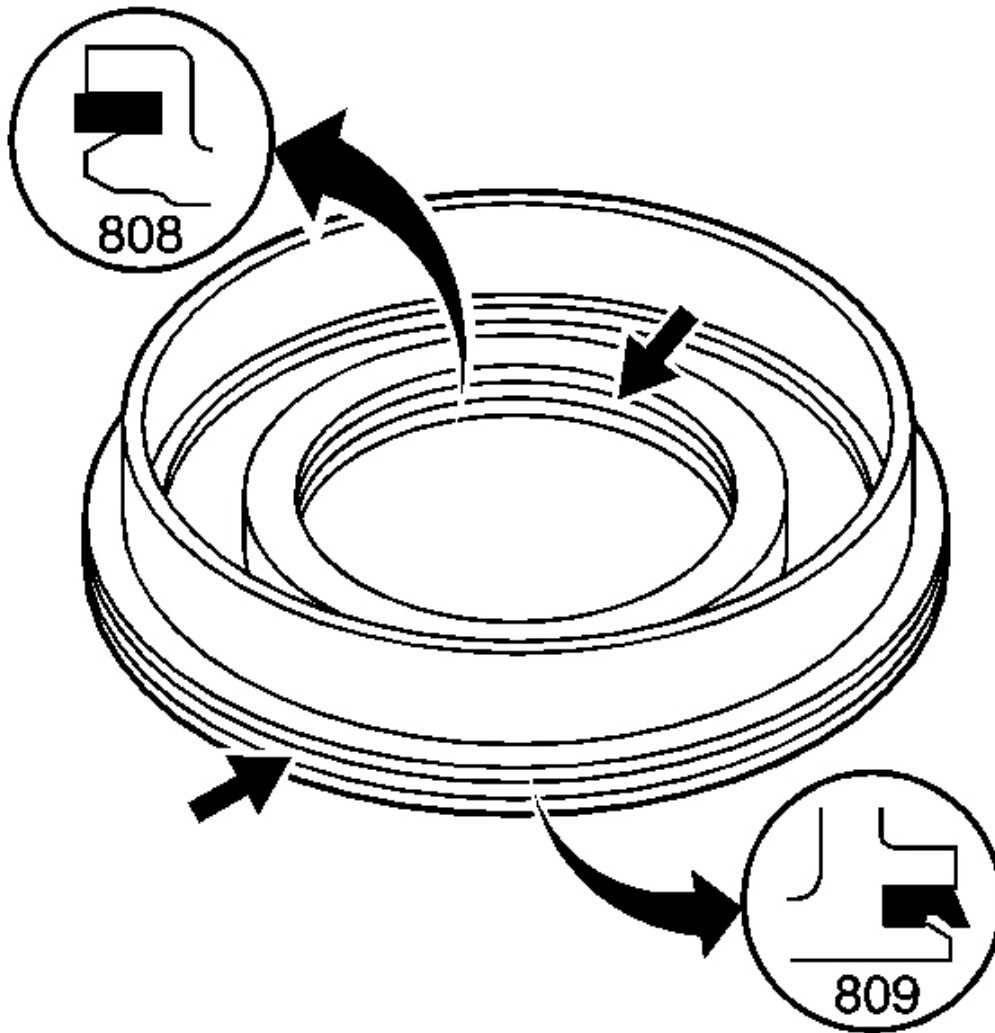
View Of Forward Clutch Piston Seals Inspection Areas
